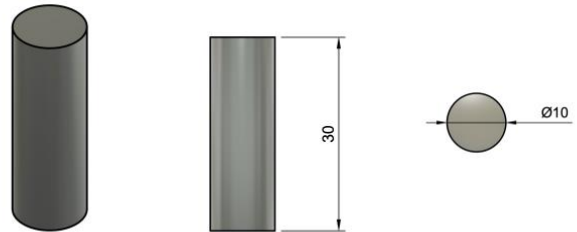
CAD of the soft iron end showing its cylindrical shape
